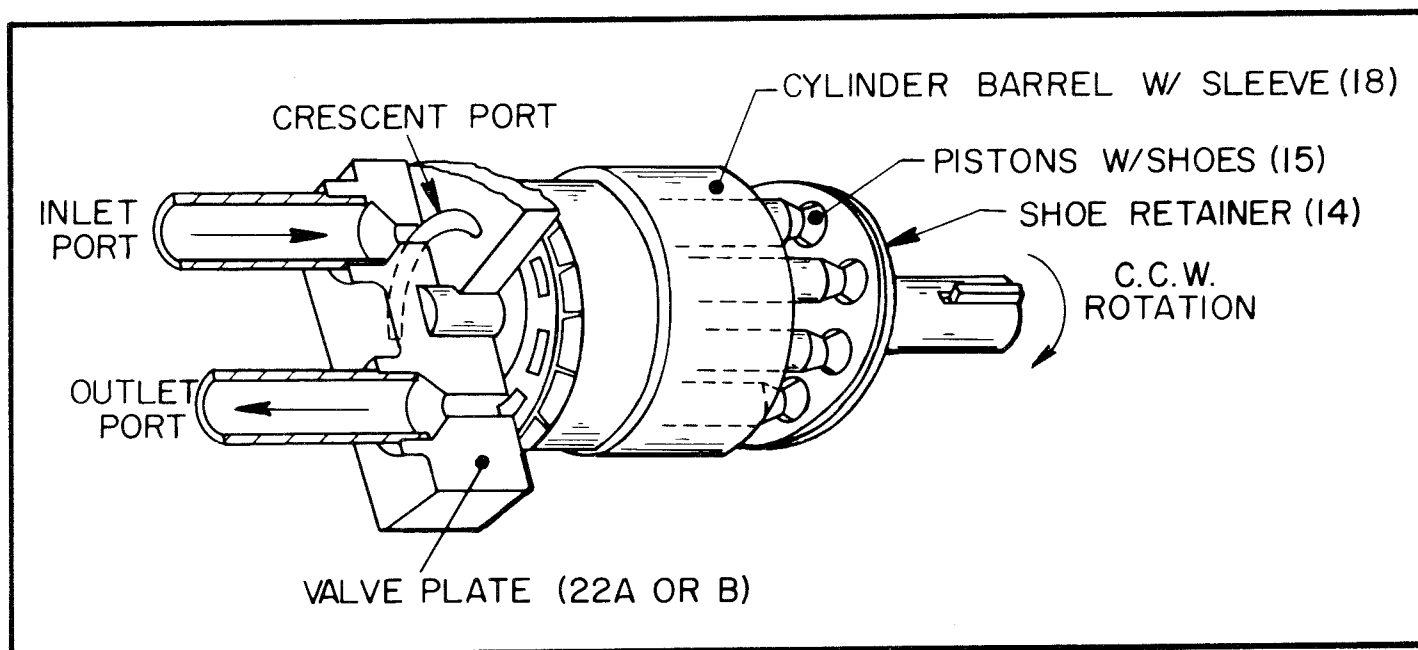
Type "PVW" Pumping Mechanism. (511783)
